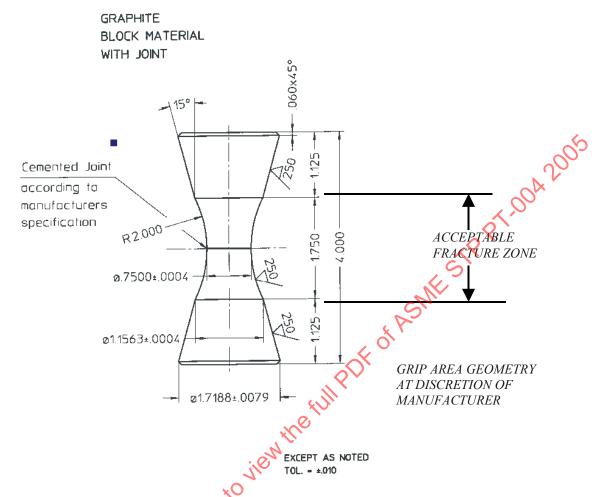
Cement Material Tensile Test Specimen (from SGL Drawing SK4322-02)
